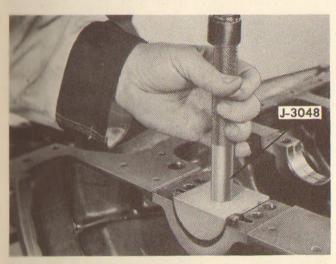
Installing Rear Main Bearing Oil Seal in Cylinder
